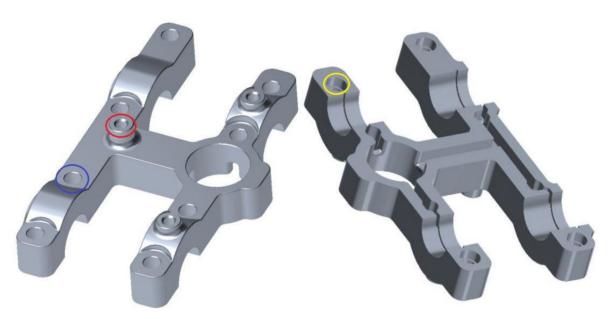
TOP VIEW AND BOTTOM VIEW OF THE CAMSHAFT COVER
